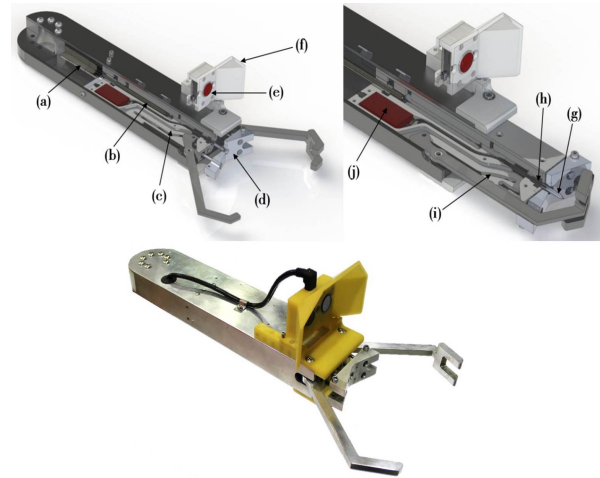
The robotic manipulator for stalk strength measurements: (a) Maxon Motor EC16 brushless DC motor; (b) Maxon Motor GP16S ball screw; (c) acetal plunger block; (d) v-block for centering plants; (e) Code Laboratories DUO3d stereo camera; (f) sun shield; (g) needle for penetrating stalk walls; (h) Futek llb215 load cell; (i) track for actuating fingers; (j) instrumentation amplifier and A2D converter.
